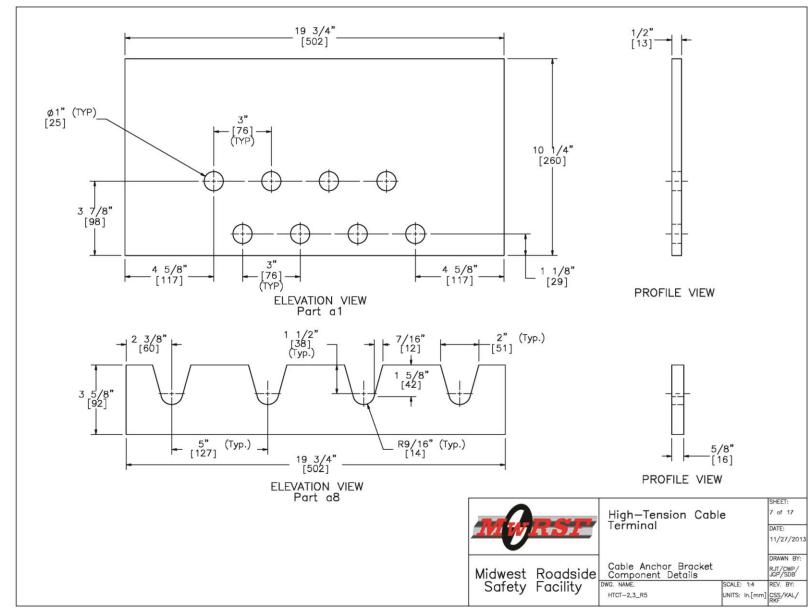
Cable Anchor Bracket Component Details, Test Nos. HTCT-2 and HTCT-3
